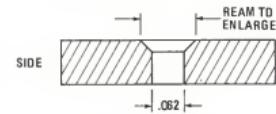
HOW SOCKETS ARE MODIFIED when you are using the combined printed-circuit and wire-wrap techniques.
